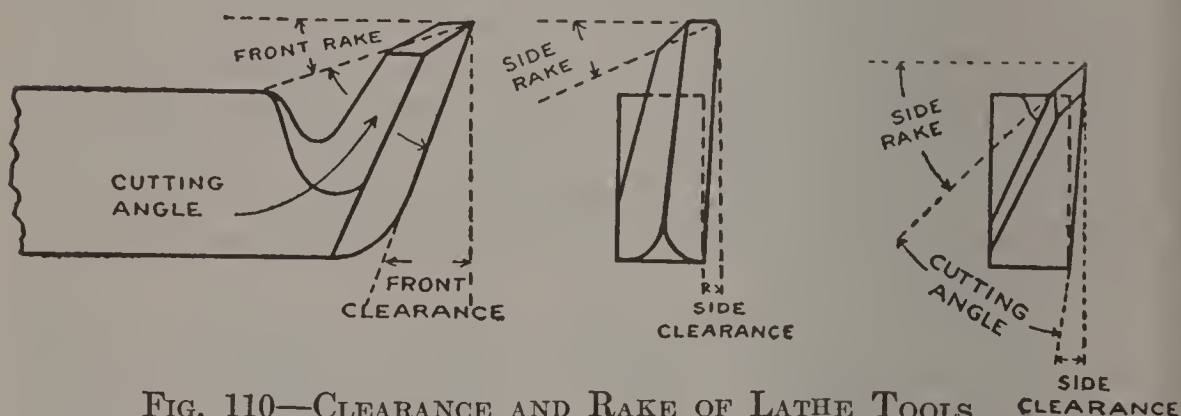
CLEARANCE AND RAKE OF LATHE TOOLS
